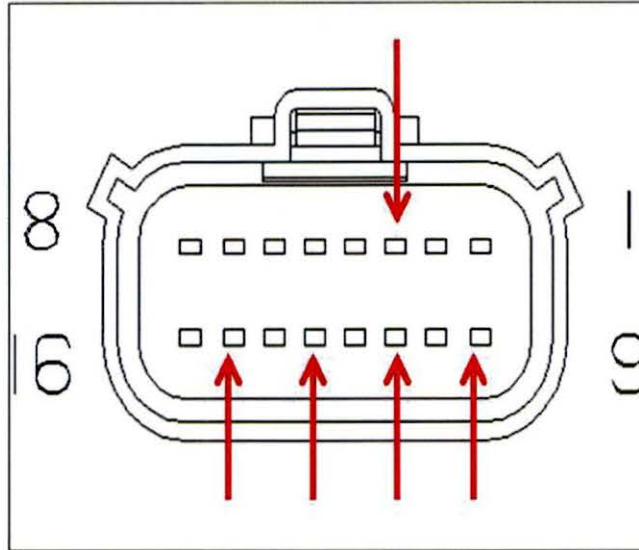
TERMINAL RELEASE TOOL INSERTED
